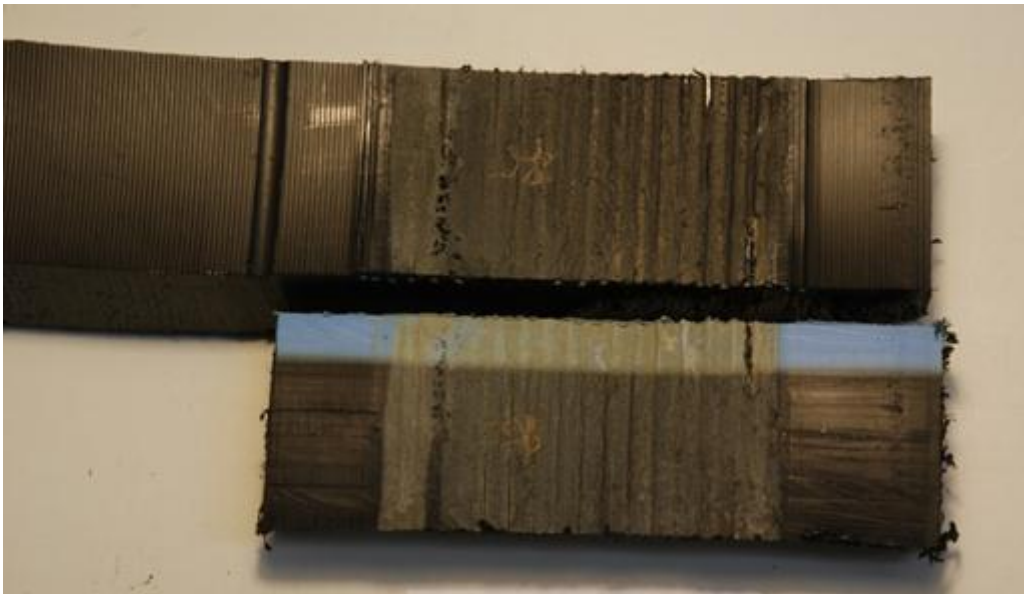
Pipe weld section after extensive cleaning. Some mud remained in weld. Long thin contaminant noticed that had mirror image on the fitting surface.
